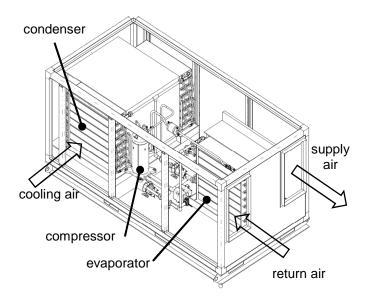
Engineering Drawing of the LDDX-WF Prototype
